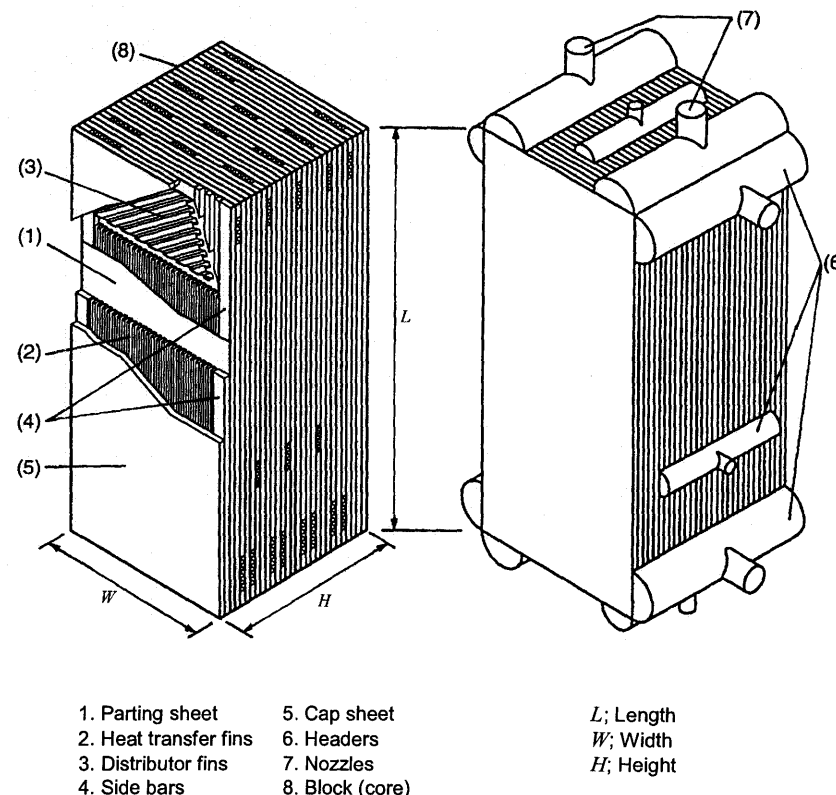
Components of a Brazed Aluminium Plate-Fin Heat Exchanger
